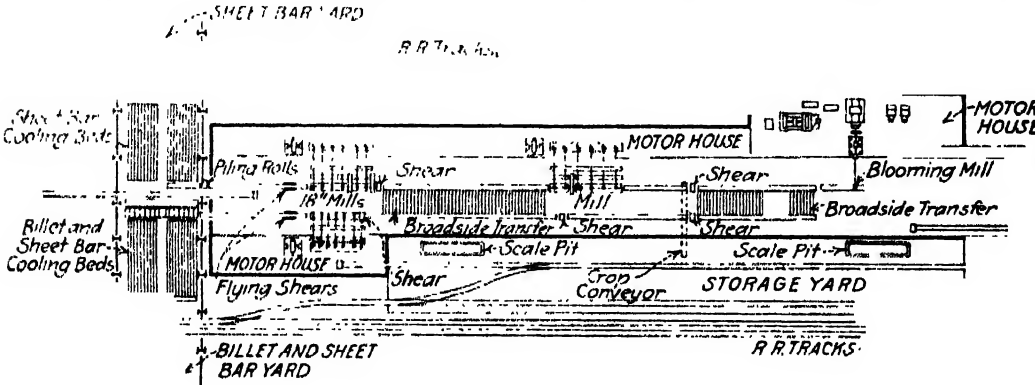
Blooming Mill and Continuous Billet and Sheet-Bar Mill (One Roughing and Two Finishing)
